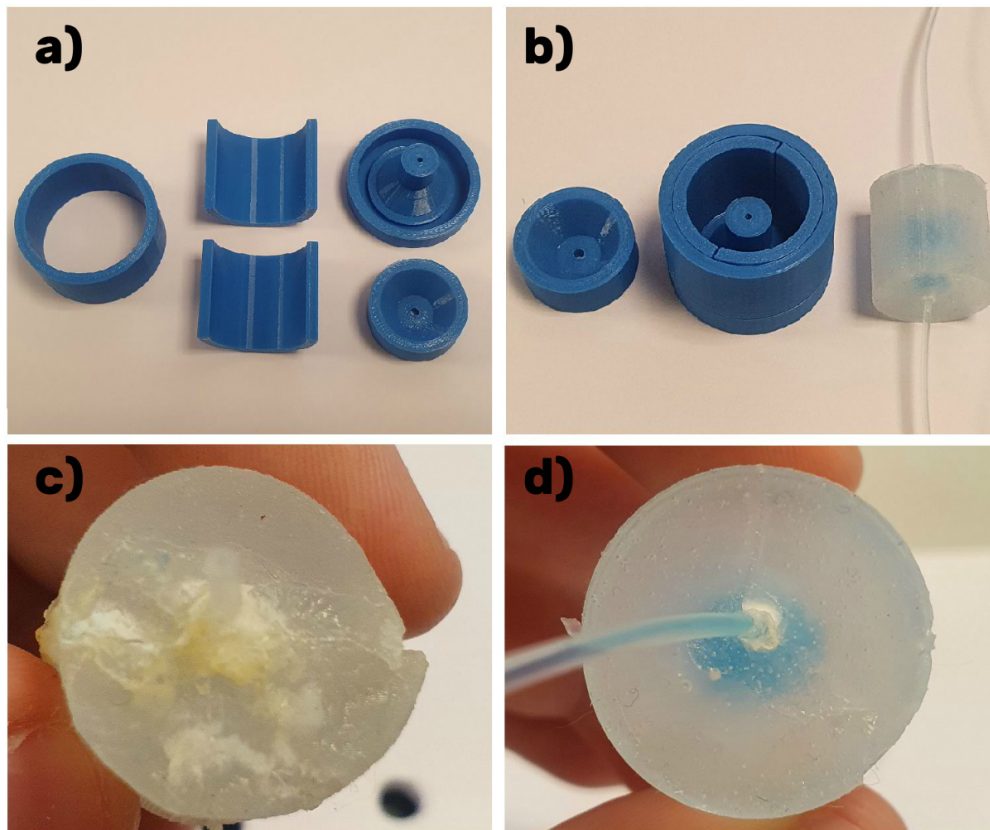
Silicone phantom brain. a) 3D-printed mold C disassembled. b) Assembled mold C with separate smaller mold for the frustum lid. c) The initial attempts of gluing together two half-cylinders resulted scarring on the phantom surface. d) The phantom brain cast using mold C had a much smoother appearance as less cyanoacrylate glue was needed.
